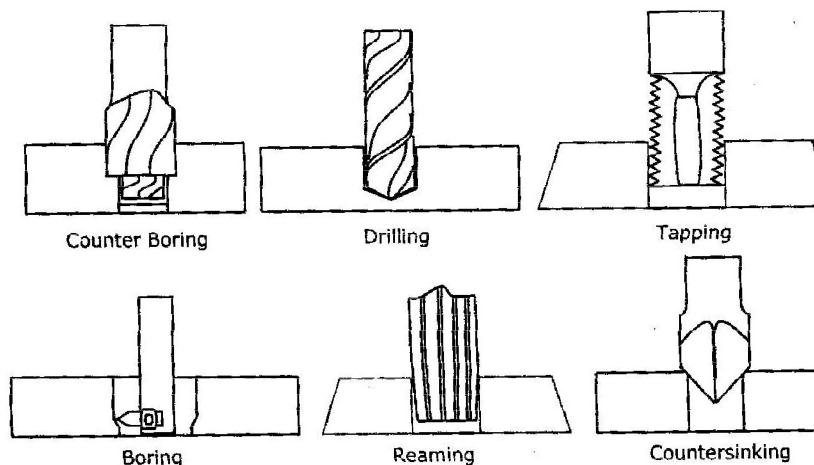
VARIOUS OPERATIONS ON DRILLING MACHINE
